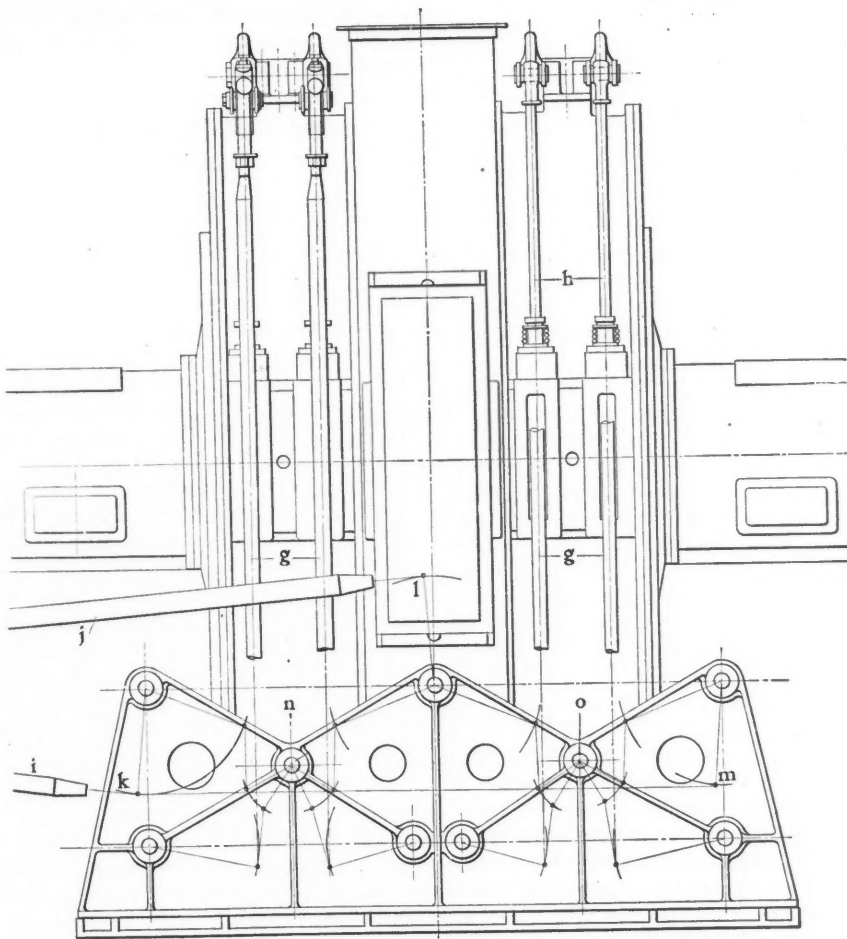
WRIST-PLATE MECHANISM AND SUPPORT
